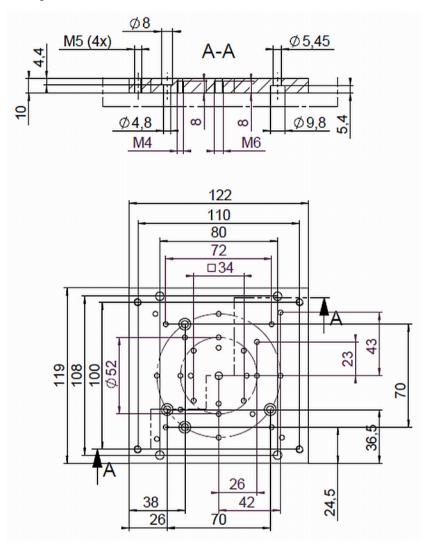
Dimensions of the M-417.AP1 mounting adapter
